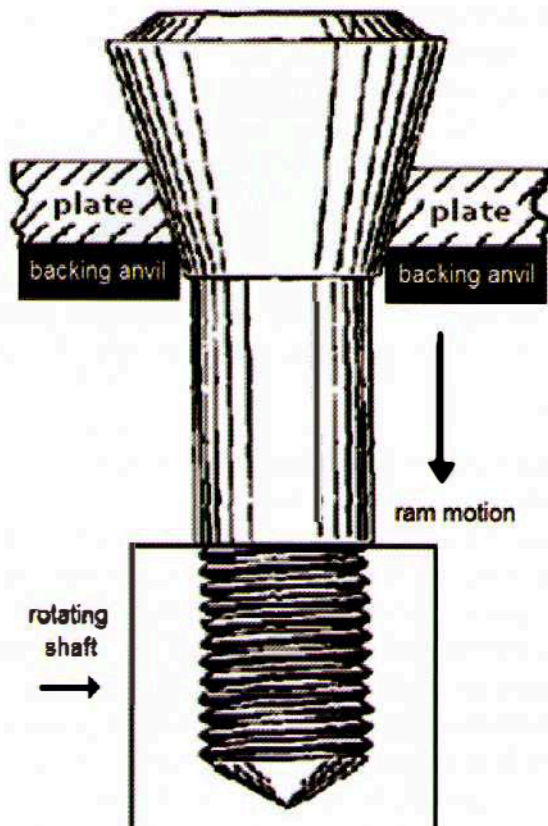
Illustration of FPPW. The plug shank is screwed into the weld tool, then the plug is pulled through the hole while rotating at very high RPM.
